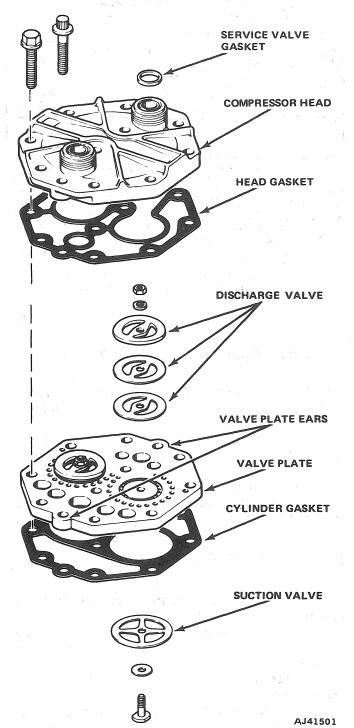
E-21 Head and Valve Plate Assembly Sequence
